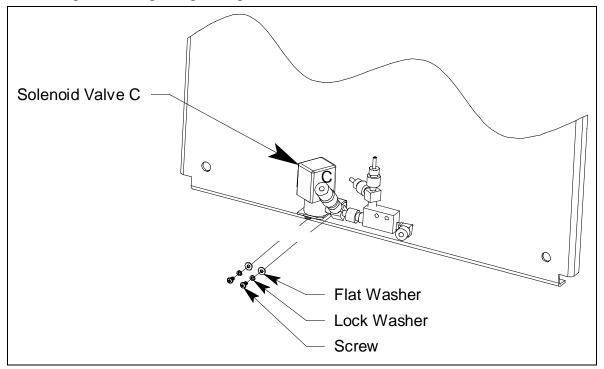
Solenoid Valve C Bracket Removal for Aspirator Replacement
